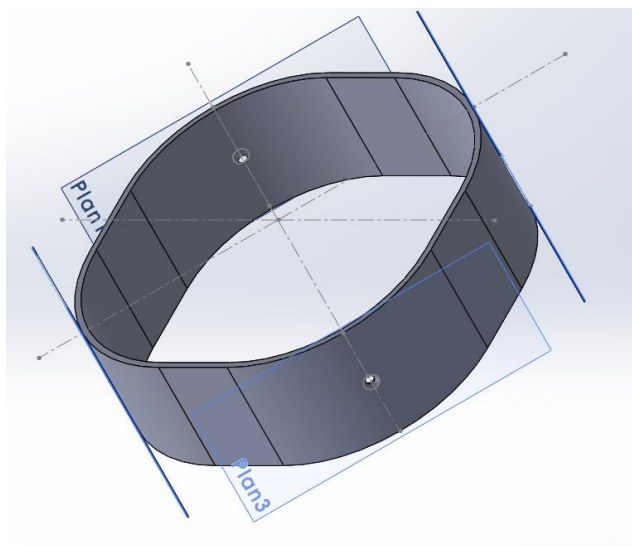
Inner piece which fits inside the head part and the bottom part. Designed with Solidworks.
